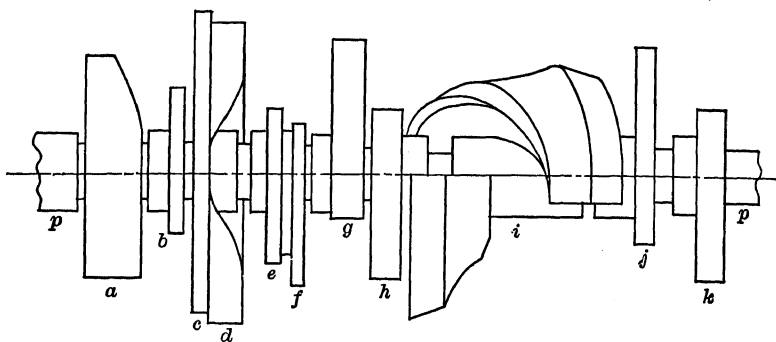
PRACTICAL EXAMPLE OF CAM SHAFT CARRYING ELEVEN CAMS
